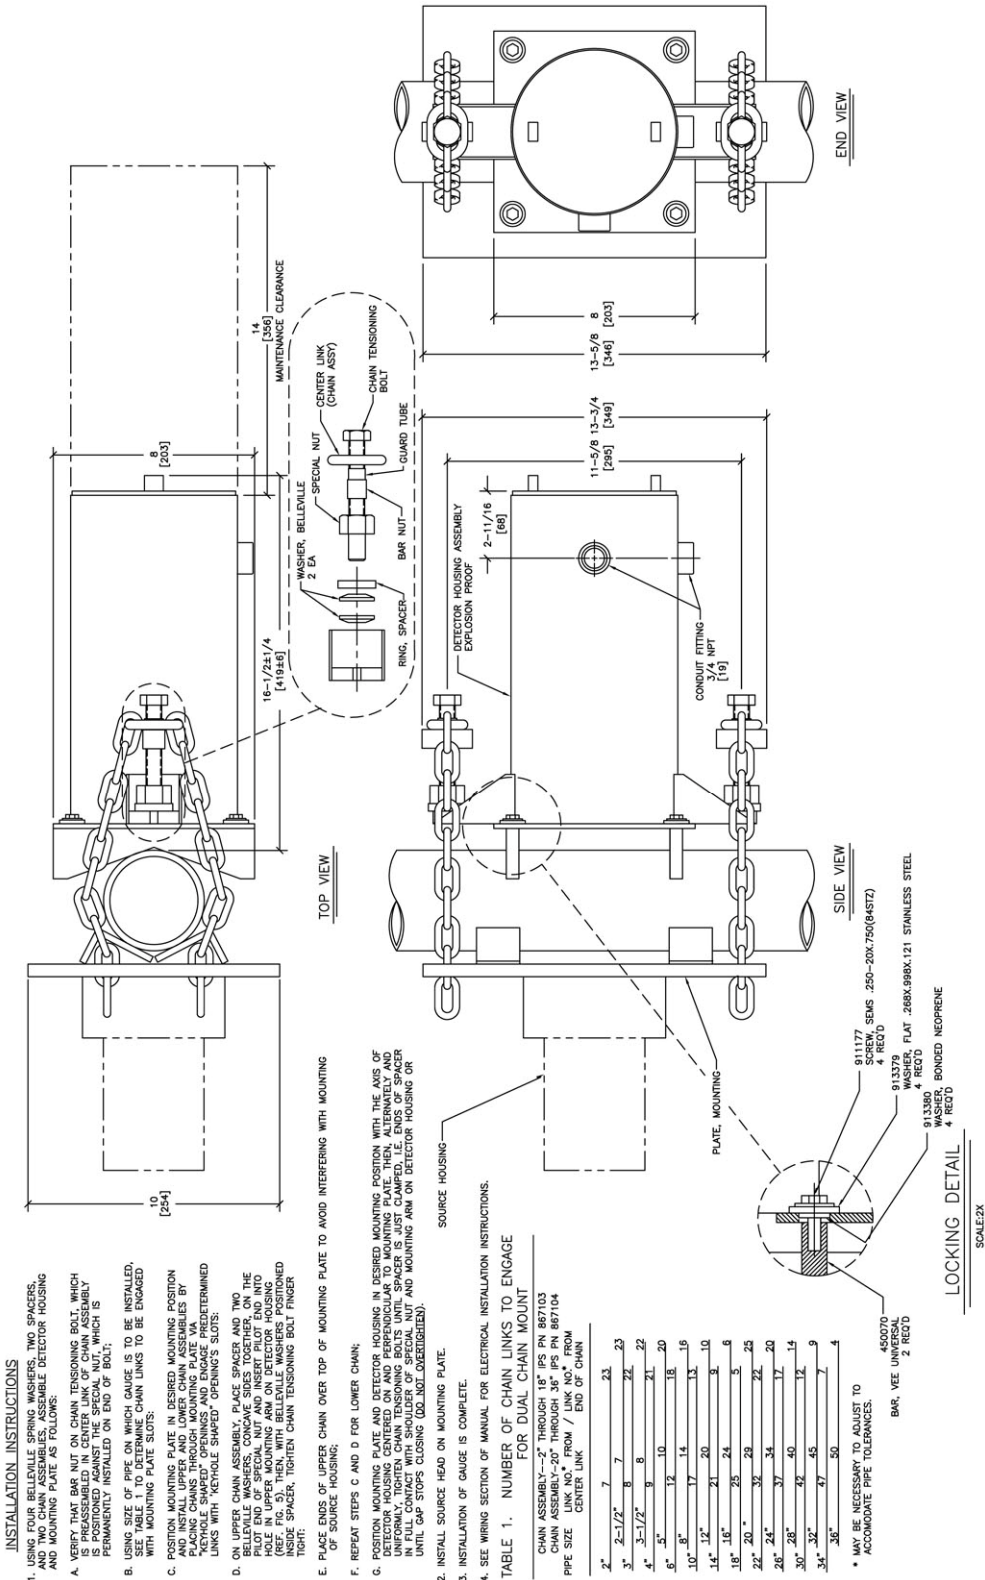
867467: Installation drawing, source/detector assembly dual chain mount, explosion proof housing (sheet 1 of 1)
